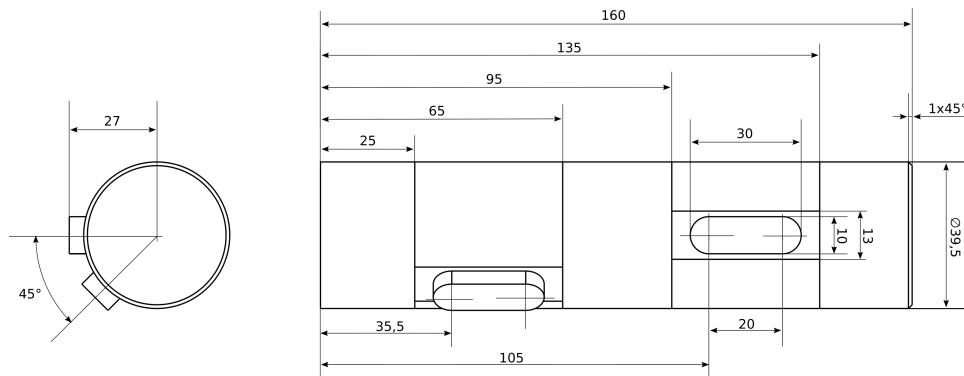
Two keys are mounted with an angular offset on a shaft. This workpiece is used for the assembly task *Pleuel*.
